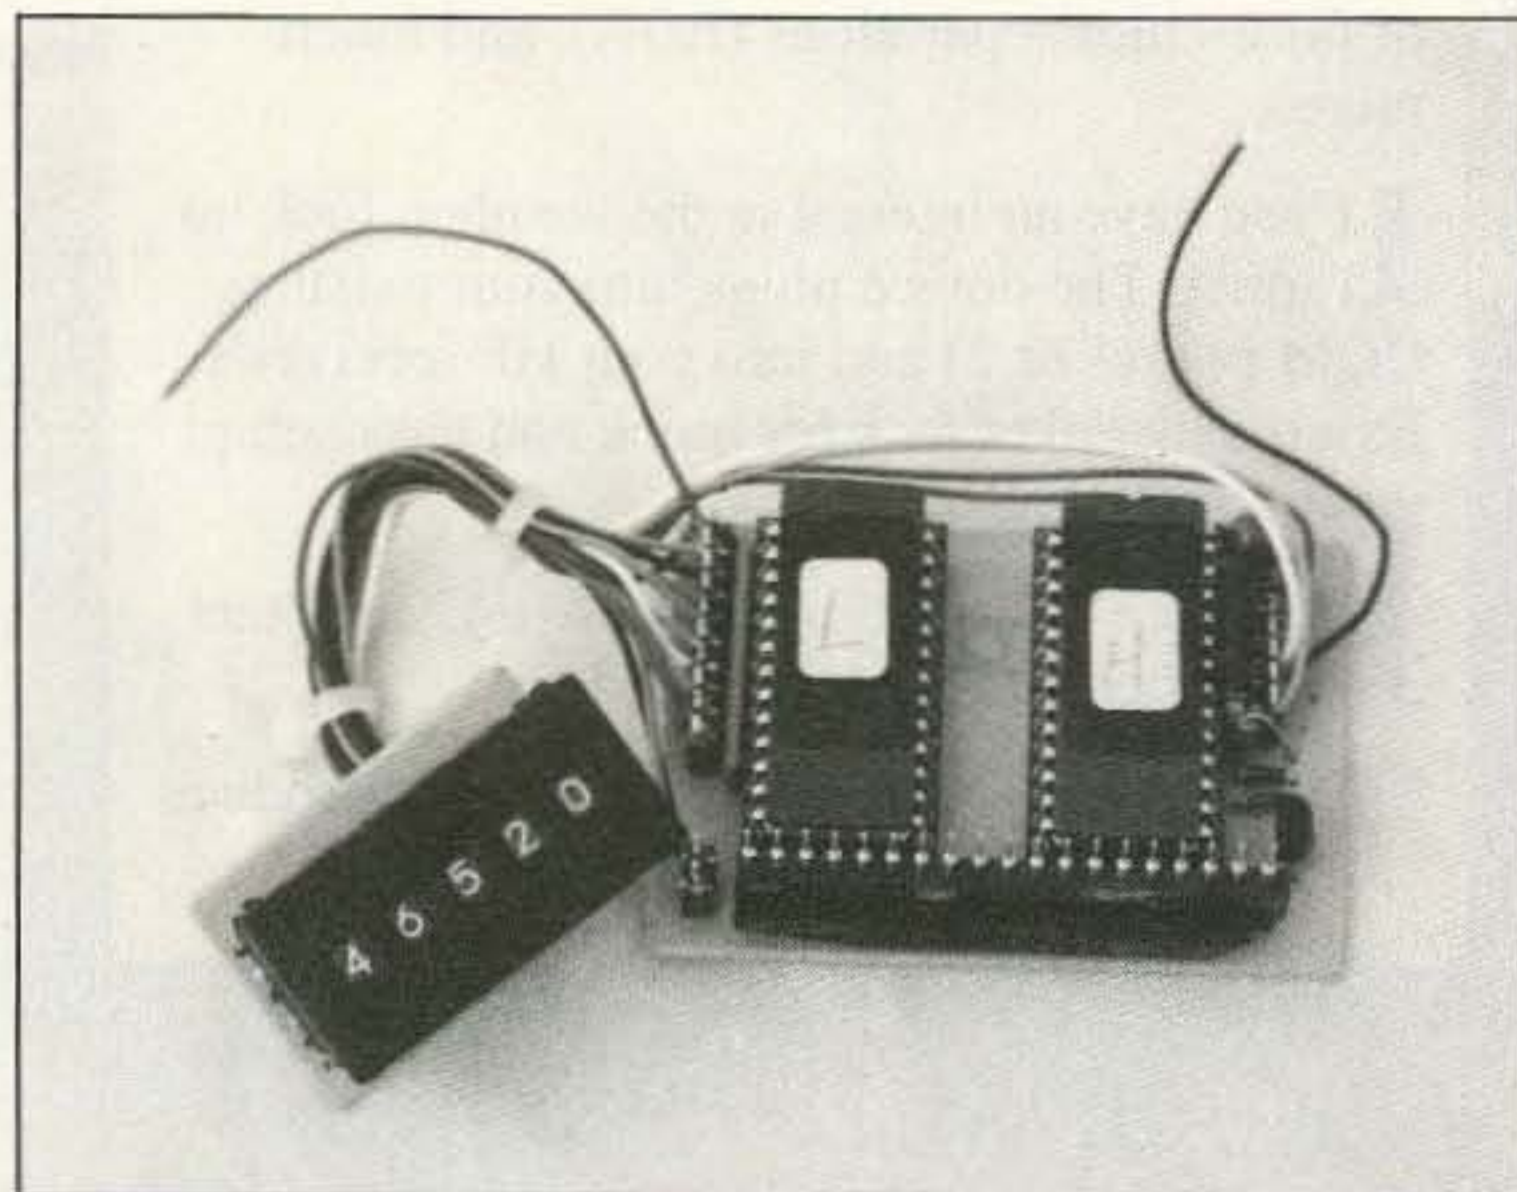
Photo B. The completed EPROM board and thumbwheel switch assemblies. Note the 19-pin header which allows the circuit to plug in directly to the FX-146 PC board.
